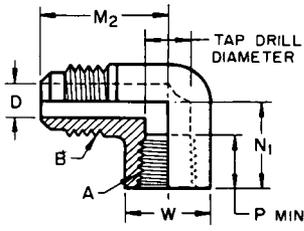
DEG INTERNAL PIPE THREAD ELBOW
